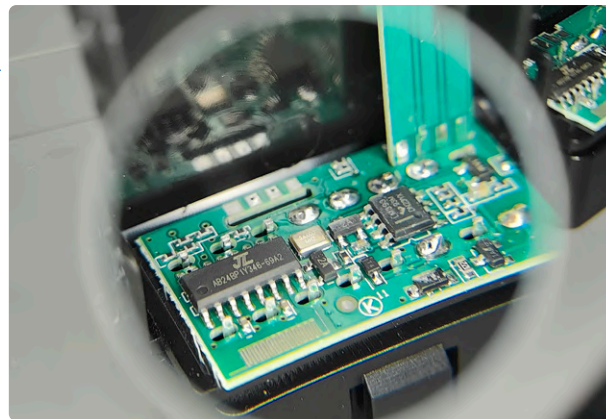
Detailed internal view highlighting the identical PCB of the common single-board ELM327 clone modules.
